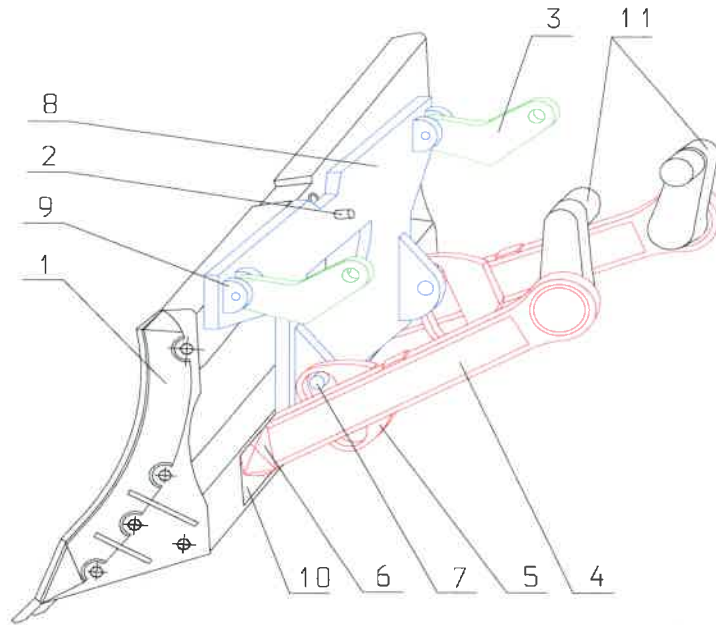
Scheme of the designed three-point blade suspension system in a Engineering and Road Machine : 1 - blade; 2 - cylindrical joint shaft; 3 - upper lever; 4 - lower lever (drive); 5 - blade guide with circular cut; 6 - spherical cap; 7 – guide pin; 8 - intermediate frame of the blade; 9 - hold; 10 - hole made in the blade; 11 - cranks [5]
